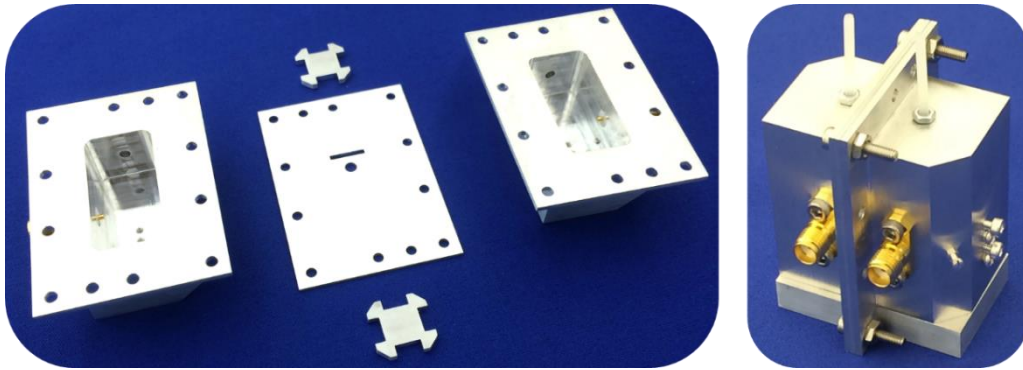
Photograph of prototype filter - fabricated parts and assembled filter
